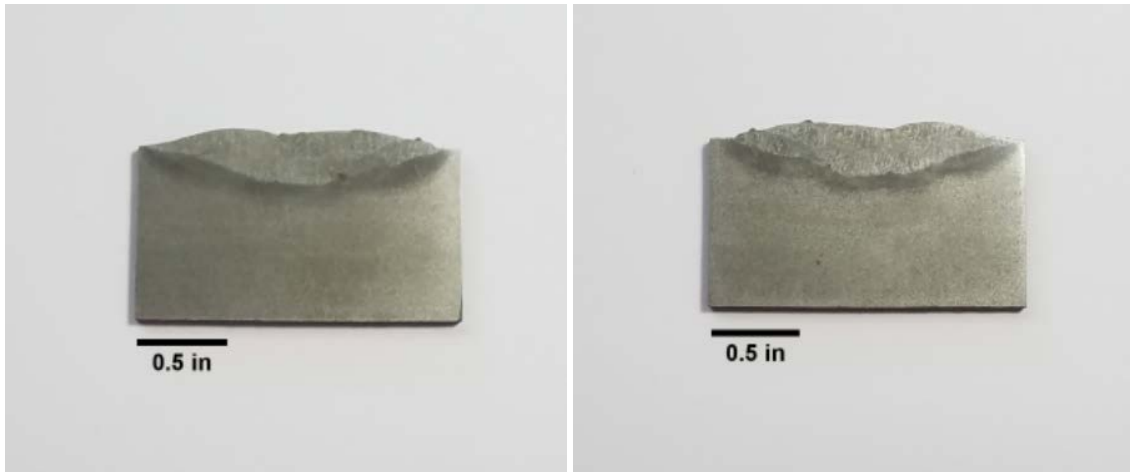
Etchings from the second weld (27.3 volts and 350 ipm).
